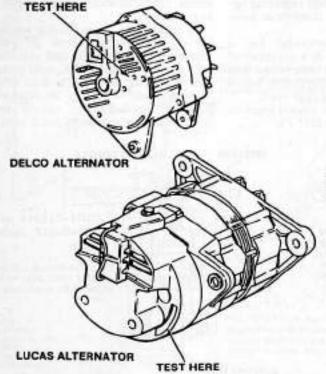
View showing hole location for by-passing voltage regulator. Refer to paragraph 184.
